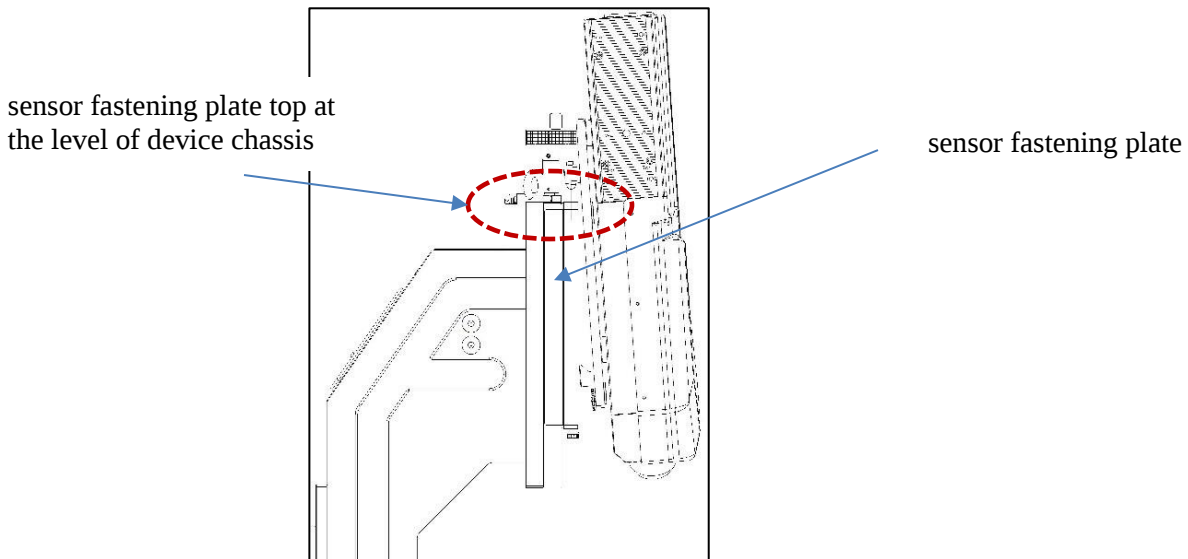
Lifting the Sensor in Place — 2 (sensor fastening plate top at the level of device chassis)
